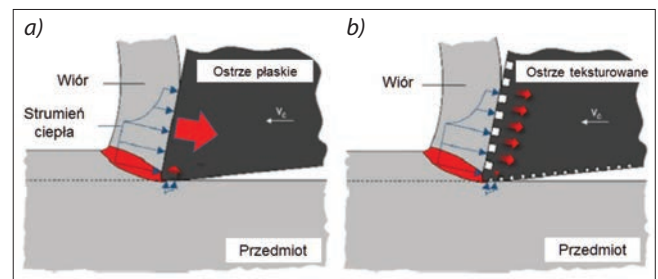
Scheme of heat flux distribution at the chip-tool interface for: a) non-textured cutting tool and b) textured cutting tool [2]
